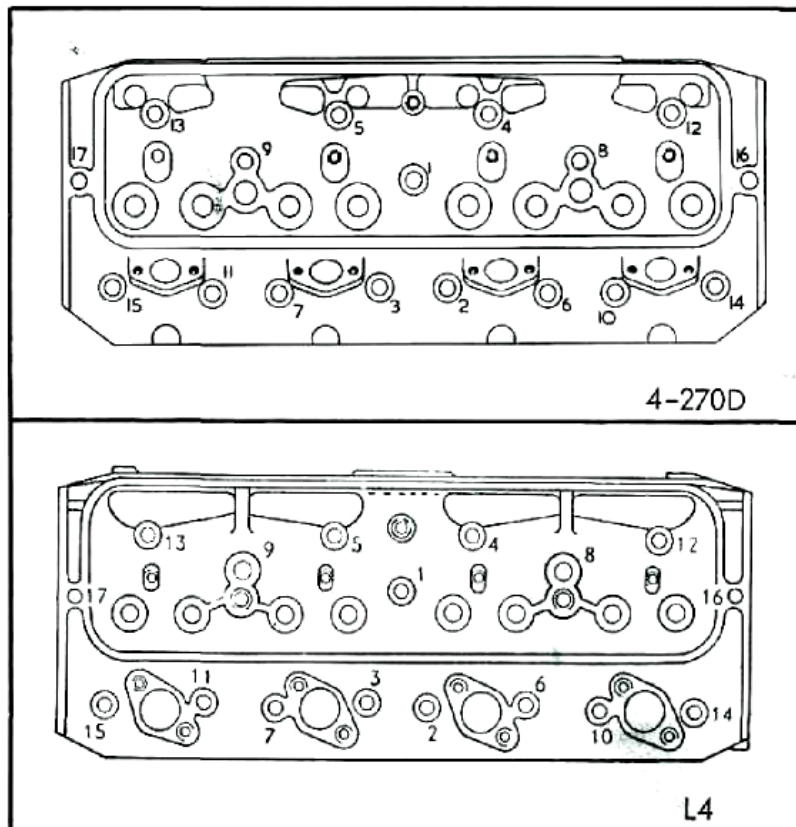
Cylinder Head Nut Tightening Sequence.
